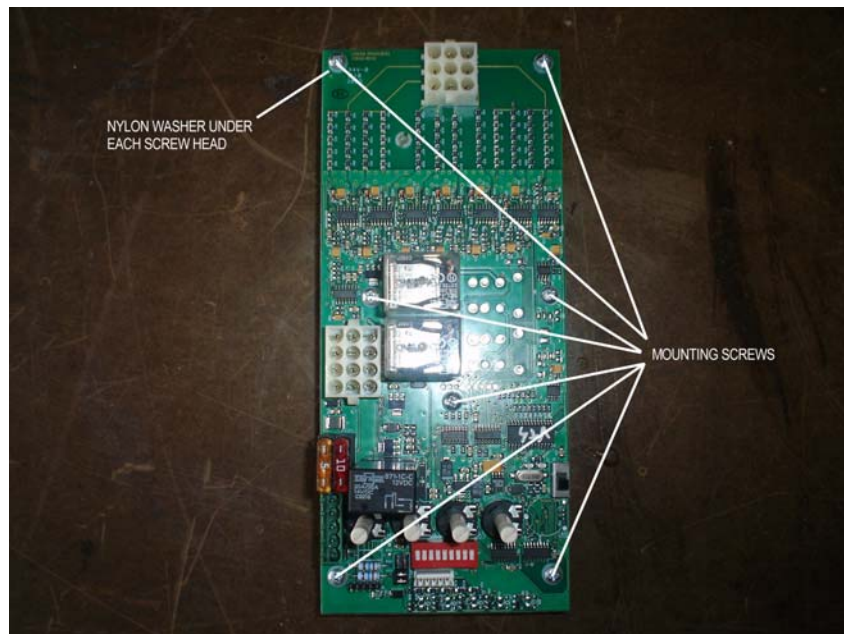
CONTROL BOARD MOUNTING SCREW LOCATIONS
